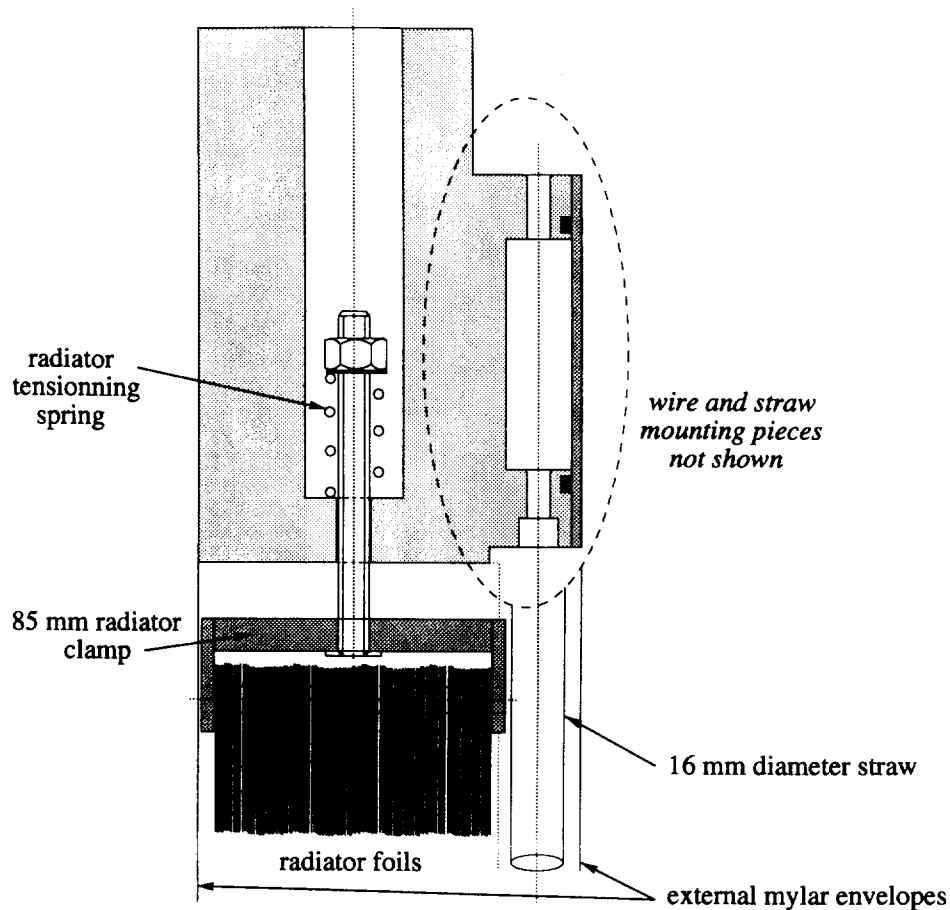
Assembly of the radiator in the TRD frame (cut view). Details of the straw tubes mounting are shown in Figure 3.5
